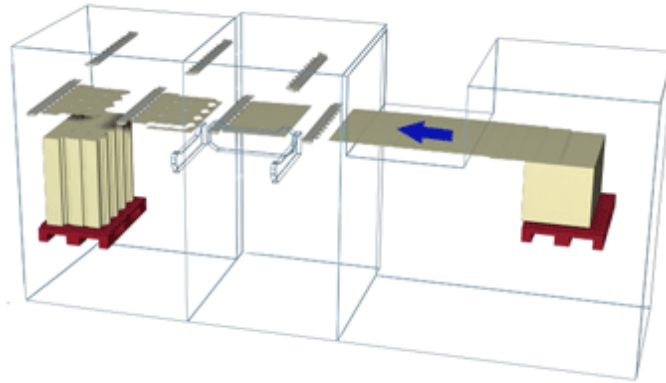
Cutting and Stripping Process (www.bobst.com)
